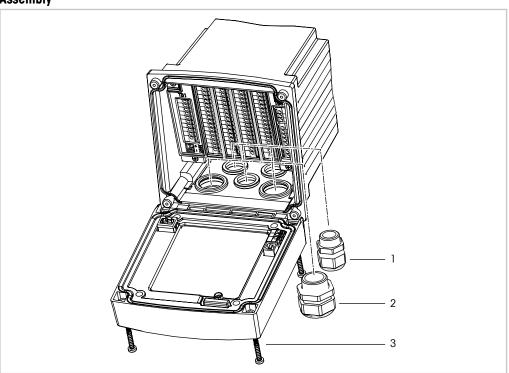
Assembly – 1/2 DIN version (PC housing)
